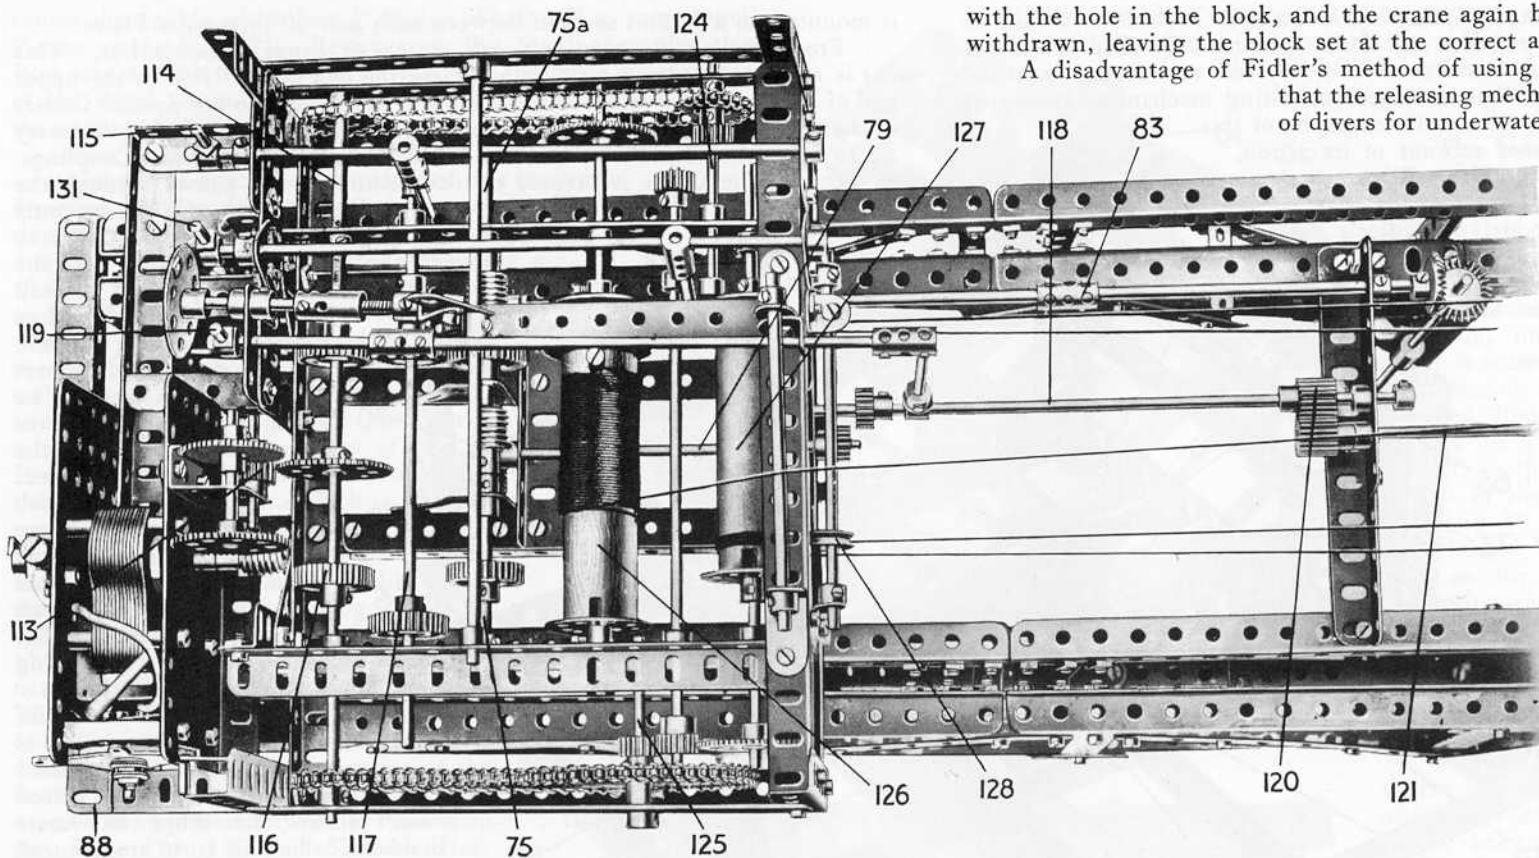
Bird's-eye view of Gear Box, Motor, and adjacent mechanism.
